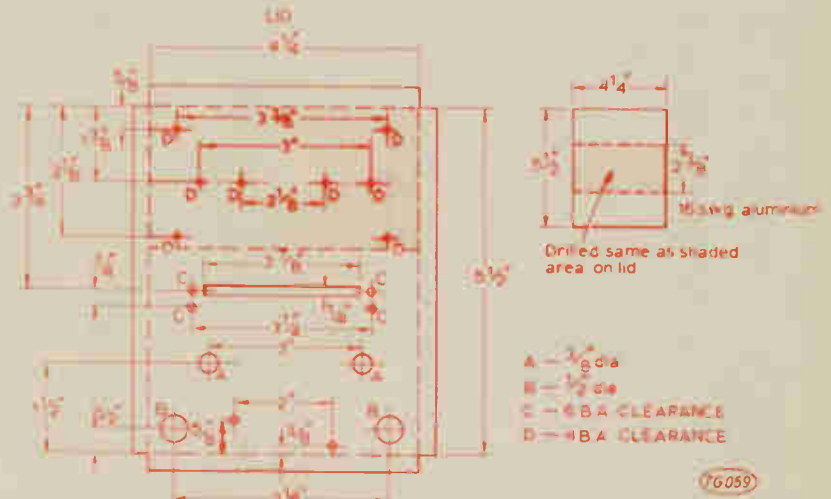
The chassis drilling details. The three-eighth inch holes may have to be larger with some toggle switches.
